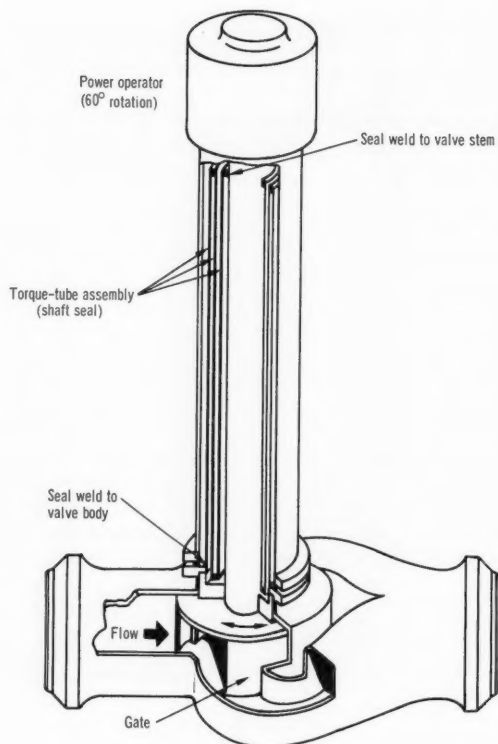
Welded-seal torque-tube plug valve operates on principle of twisting the long tube assembly to rotate the plug.
